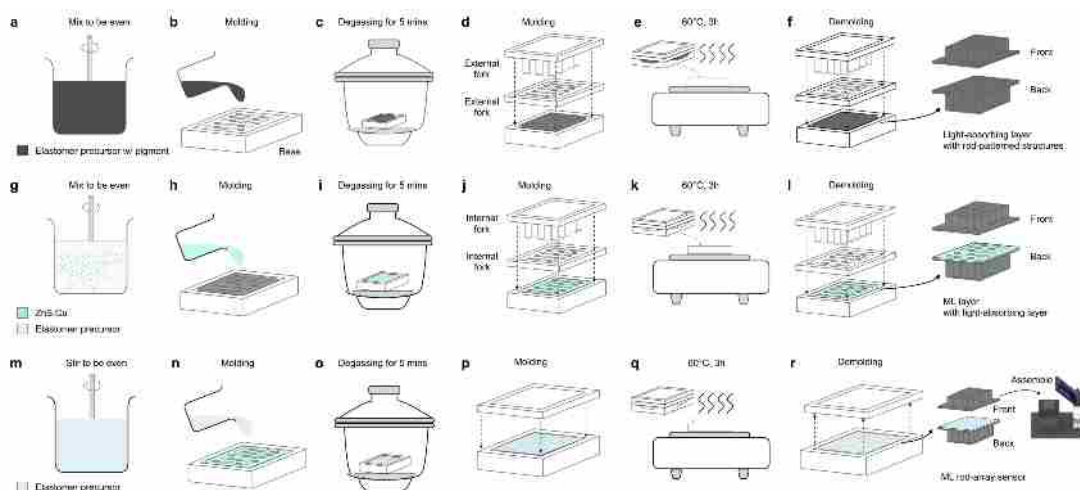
Fabrication process of the ML rod-array elastomer. a) Add rubber and black pigment into a container and mix it using a Planetary Centrifugal Mixer. b) Cast the elastomer onto the patterned base mold. c) Vacuum the elastomer mold at 30 kPa to remove bubbles. d) Insert the fork and filter mold onto the elastomer. e) Thermal curing at 60°C. f) Demold the light-absorbing layer. g-l) Repeat the process for the ML layer. m-r) Repeat the process for the rubber core layer, following the same steps. Finally, assemble the ML rod-array sensor onto the sensing module.
